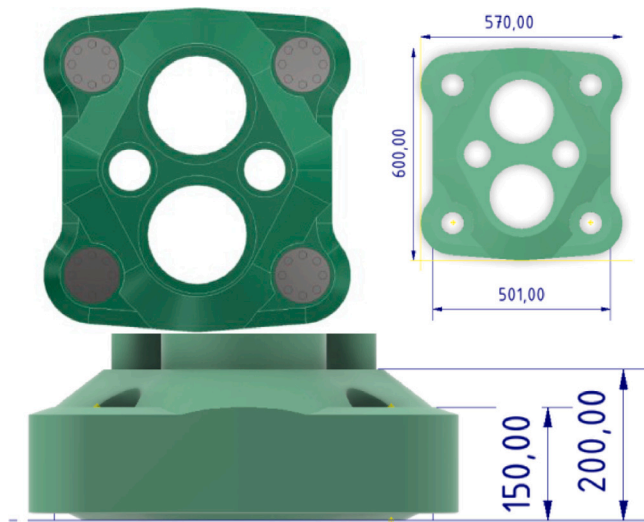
Design of MPC with bolted connections [4]. The dimensions are given in millimeters.
